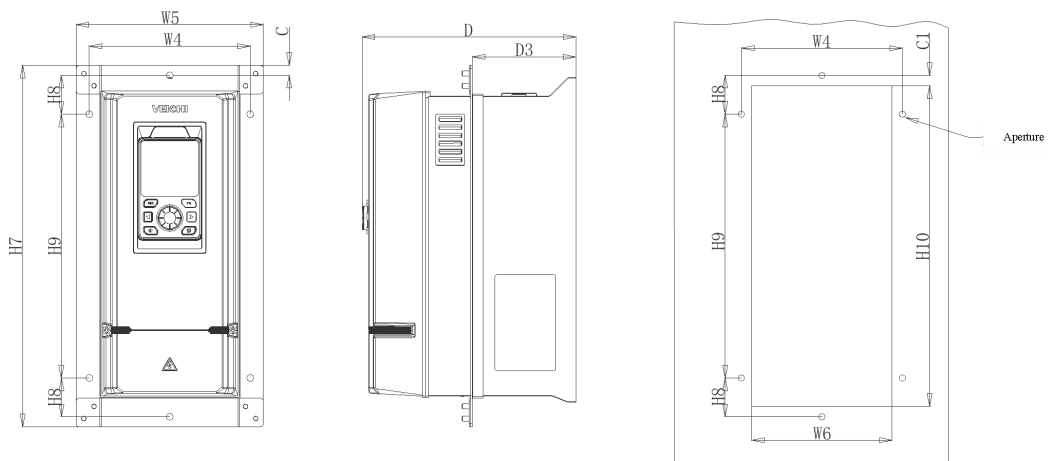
V1~V3 Wall-through Drive Overall Dimensions and Hole Size
